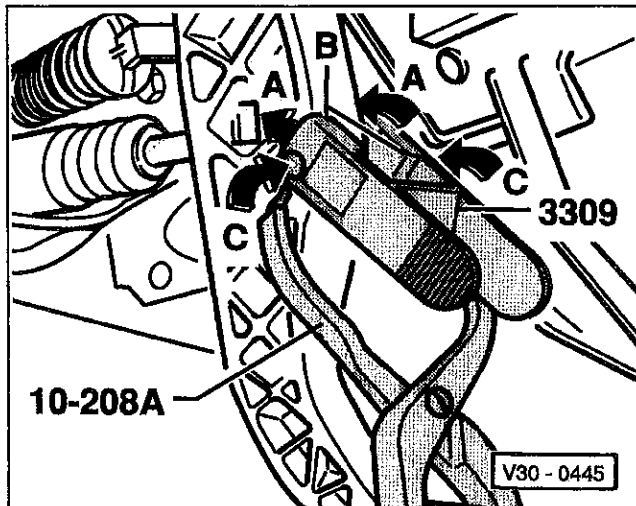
Special tools being used to remove master cylinder pushrod from clutch pedal. Insert VW special tool no. 3309 (B) into cutouts in pedal (arrows A). Then insert special pliers (Volkswagen special tool no. 10-208A) at arrows C to unlock pushrod from clutch.
